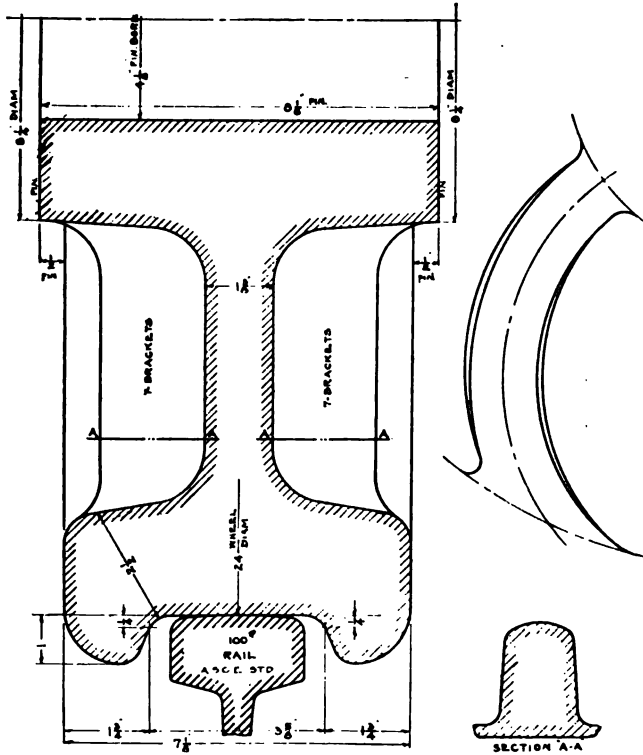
24-IN. 640-LB. DOUBLE FLANGE CHILLED IRON CRANE WHEEL, SINGLE PLATE TYPE. FOR MAXIMUM VERTICAL LOAD 34,000 LB. MAXIMUM SAFE FLANGE PRESSURE 25,000 LB.
